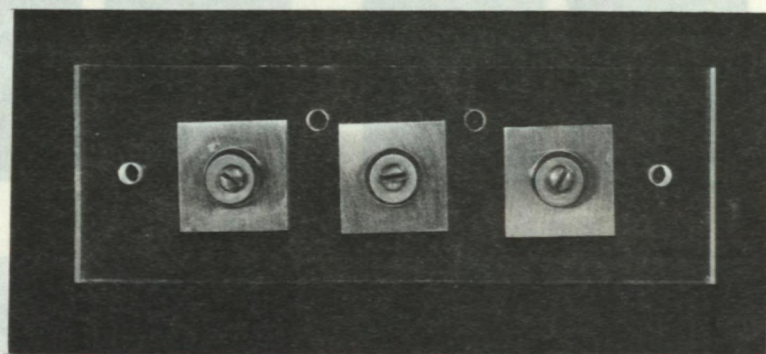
Front View of a Test Panel used in an Automotive-Trim Test.
